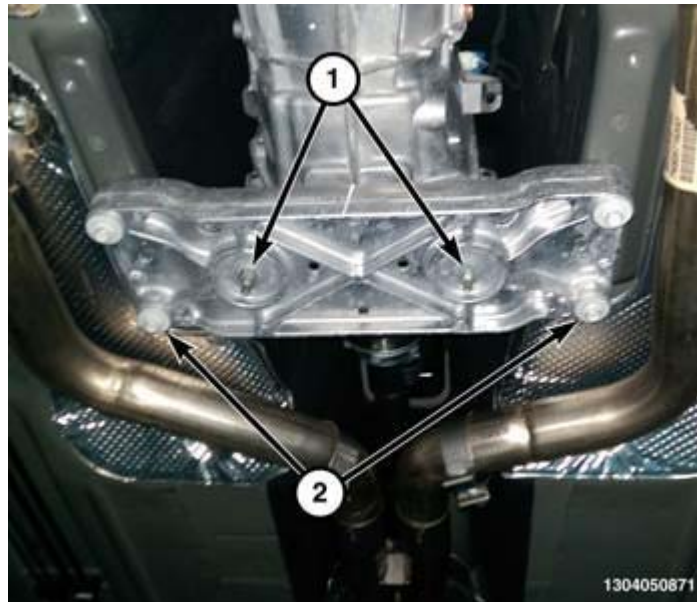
Manual Transmission Crossmember Bolts & Fasteners
